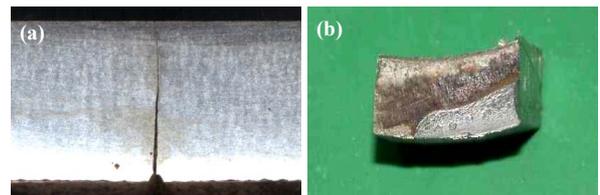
The crack by thermal stratification method (a) Thermal fatigue crack (b) fracture surface
